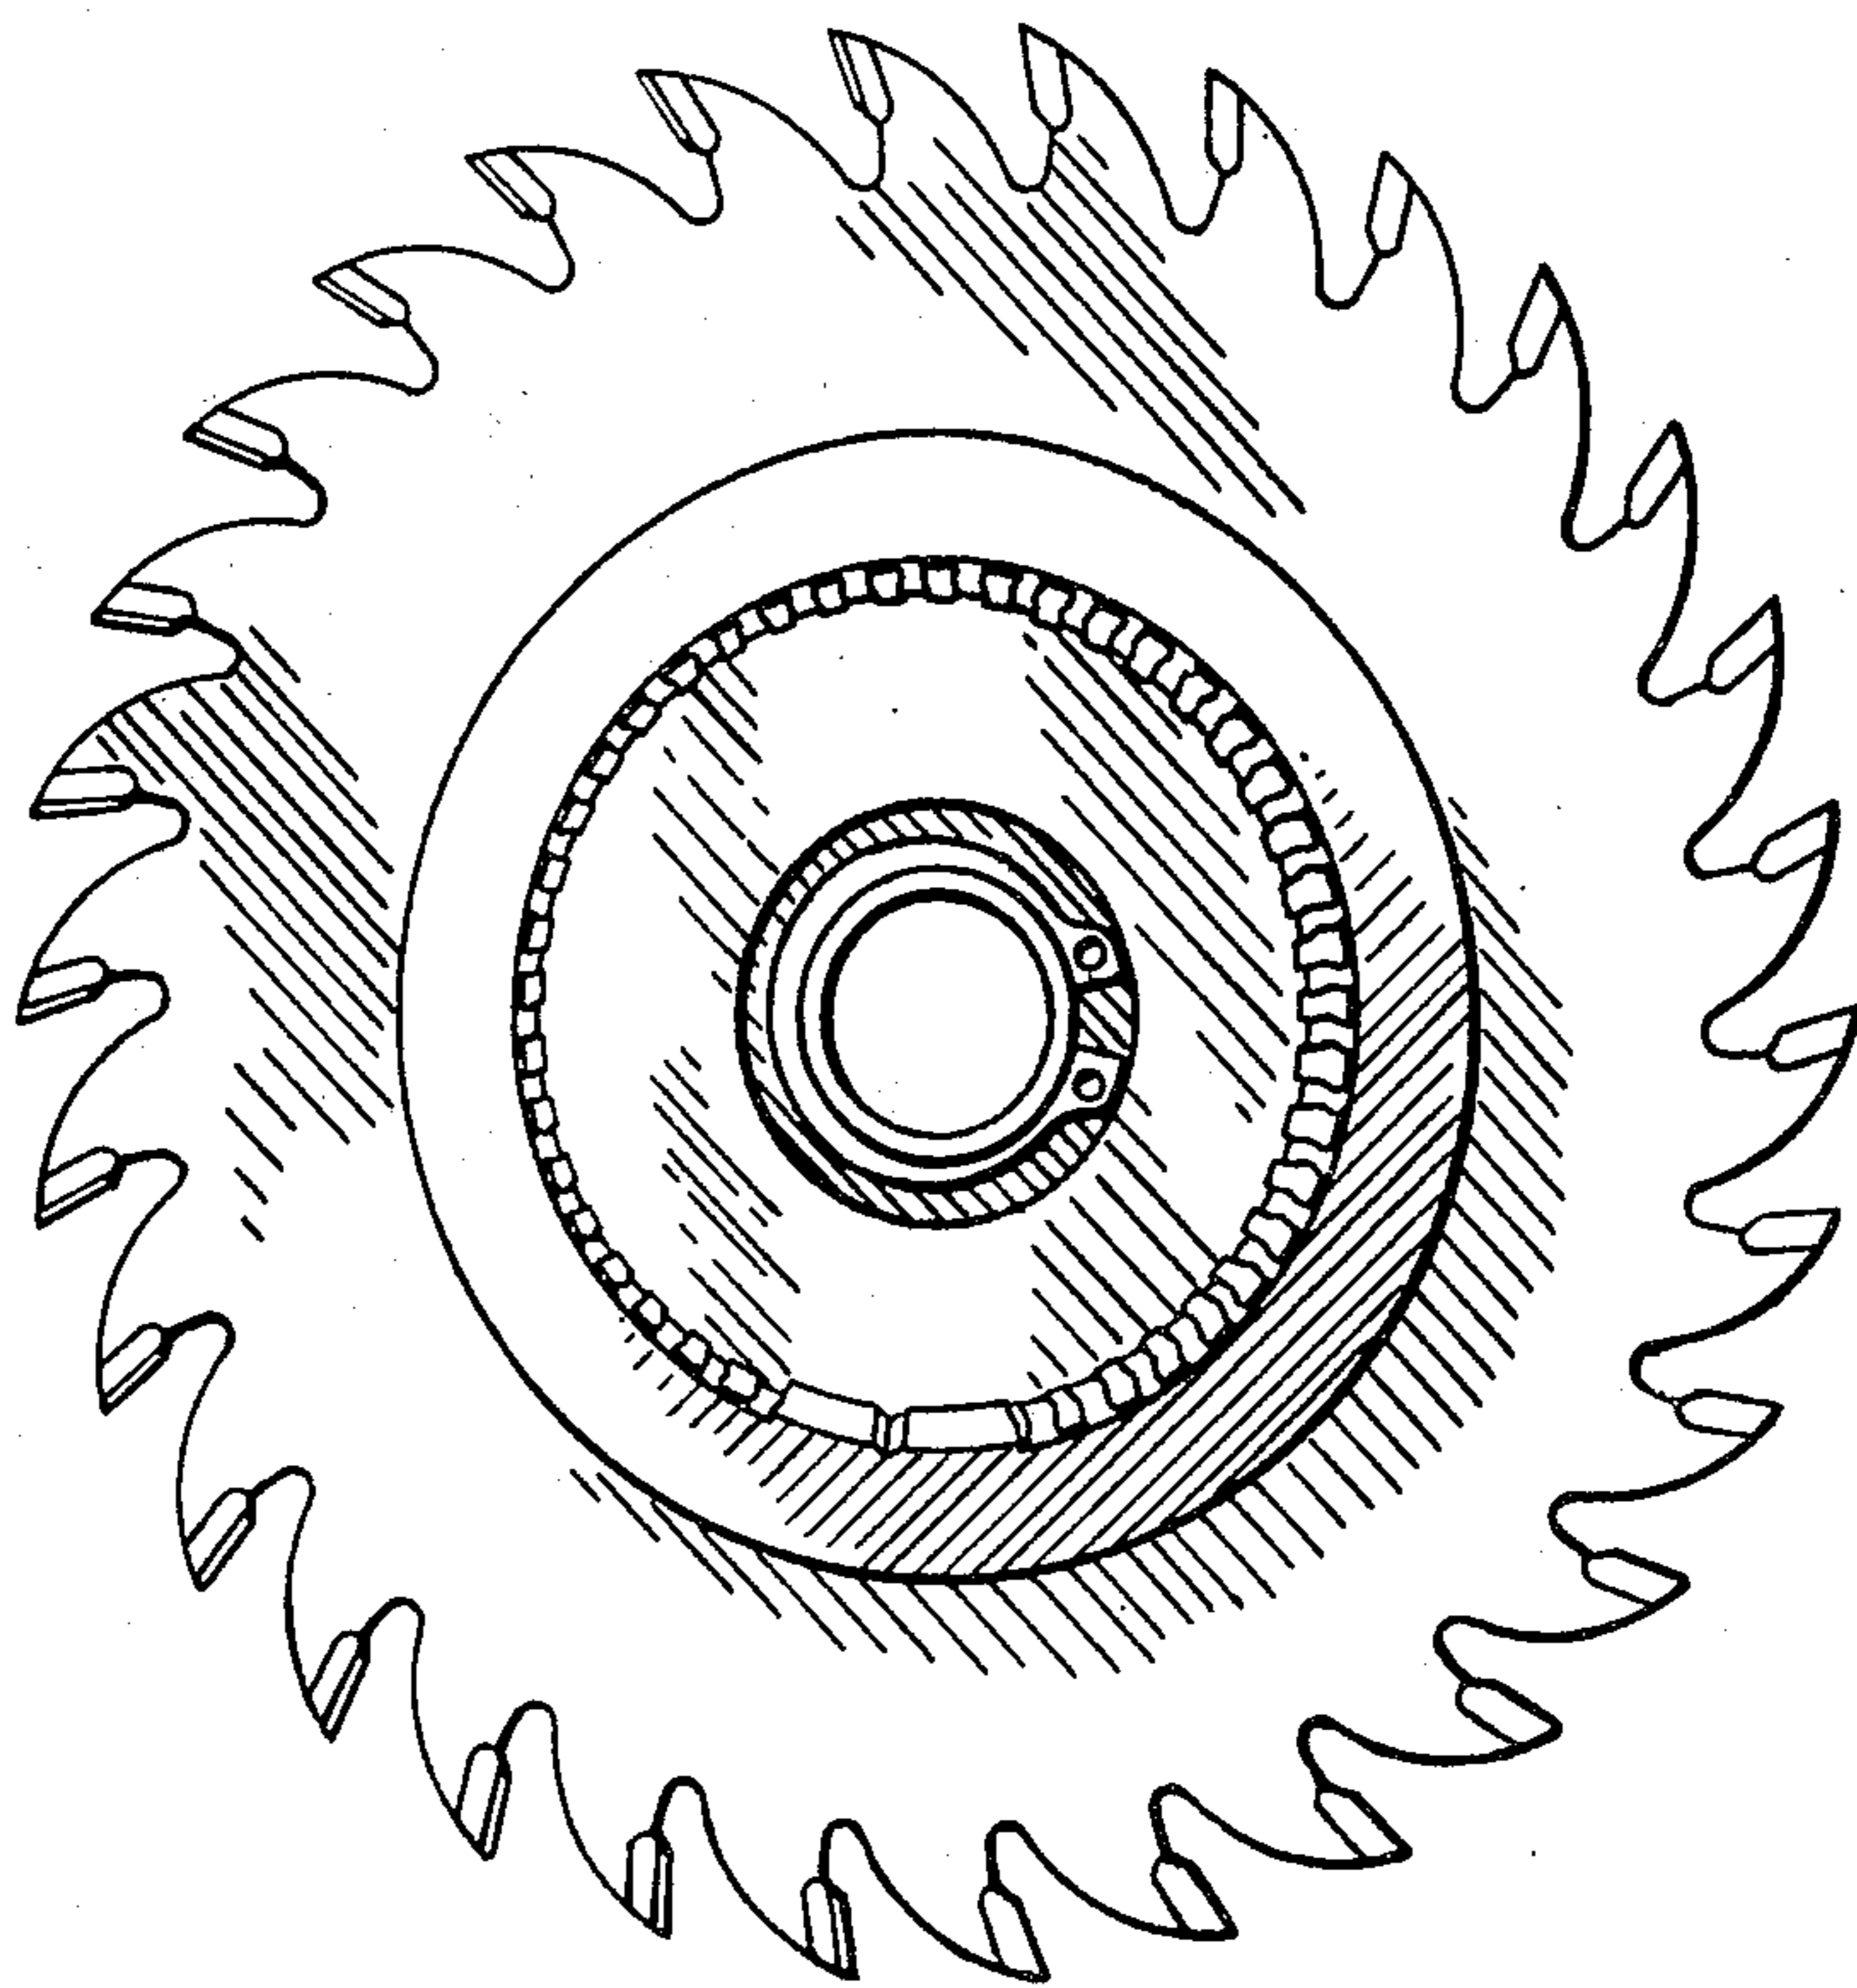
is a perspective view of a dado saw blade showing my new design;
